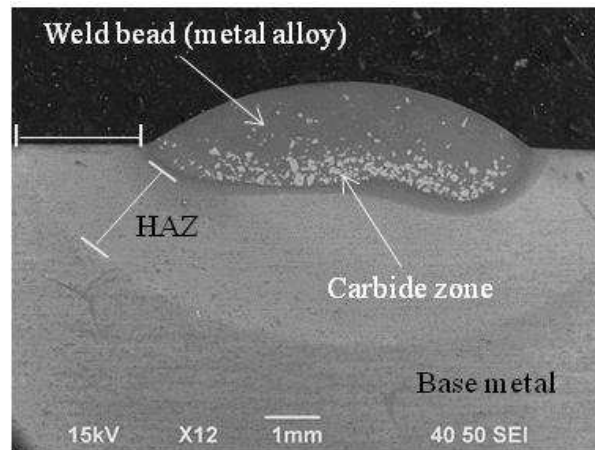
Cross section of weld bead after deposition [319]
